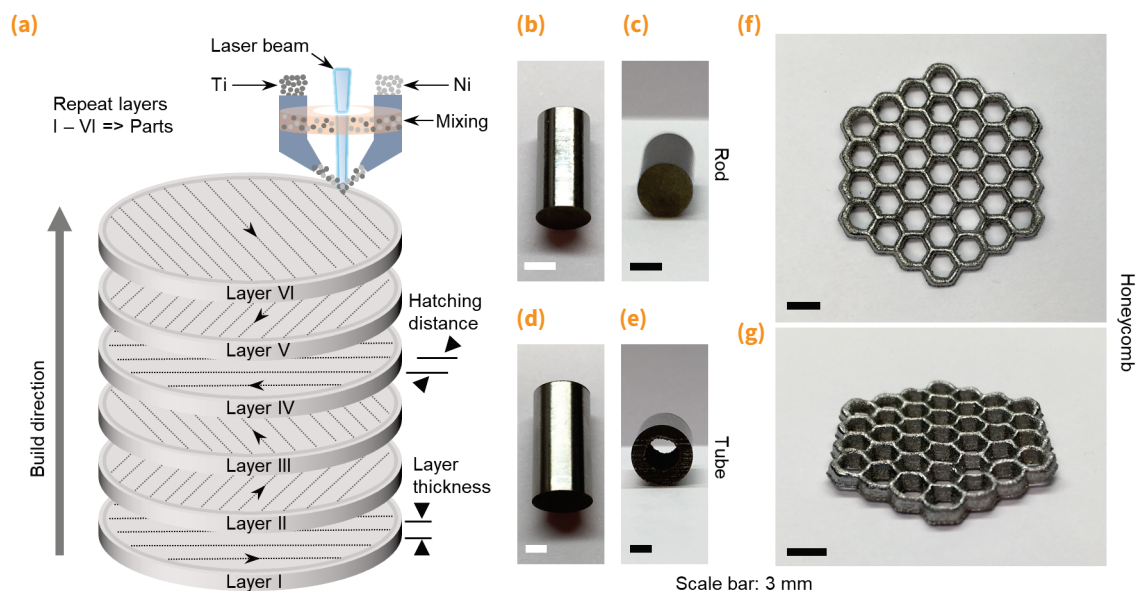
In a 3D printing, or more accurately, additive-manufacturing process, material is deposited in a sequential, layer-wise manner and fabricated directly into the (near) final part geometry. In this study, the laser directed energy deposition (DED) 3D printing technology was used, also known as laser engineered net shaping, or LENS. (a) In this process, powders are blown through a nozzle into the focal point of a laser and melted onto a substrate by the laser. A computer numerical control (CNC) bed manipulates the substrate beneath the laser in a path that forms the desired part geometry. The direction of the deposition path may be alternated in subsequent layer to improve the isotropy of the material performance in the final part geometry. Simple geometries such as (b-c) rods and (d-e) tubes may be fabricated, in addition to more complex geometries such as (f-g) honeycombs, which for solid-state cooling technologies, can be optimized to improve heat exchange between the elastocaloric SMA and its surrounding environment. Adapted from Hou et al.^[1] with permission.
